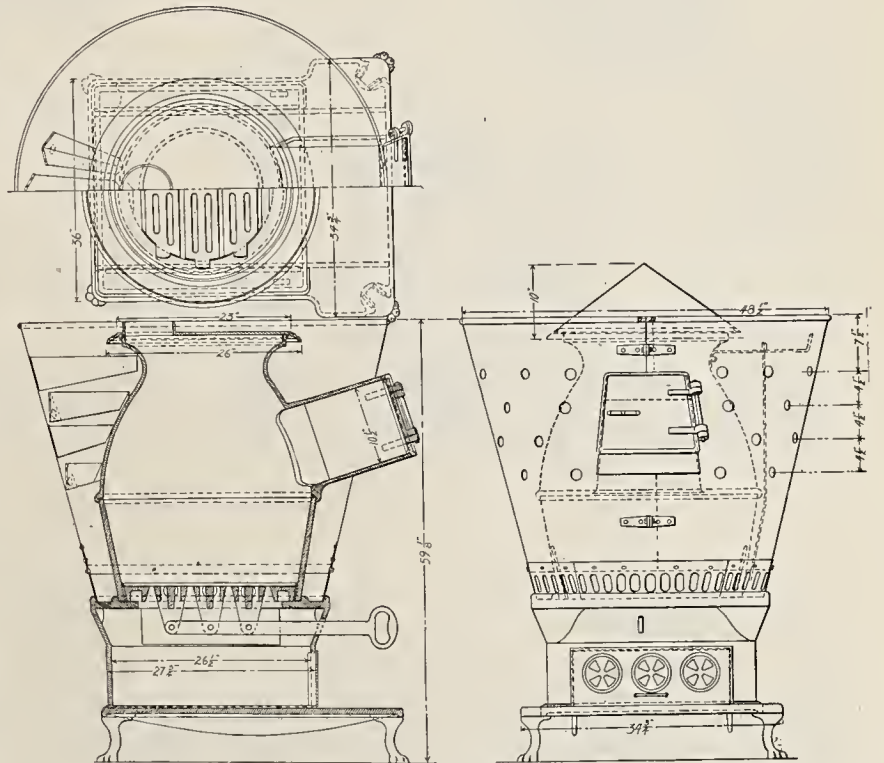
C. M. & ST. P. RY. SAND STOVE.
